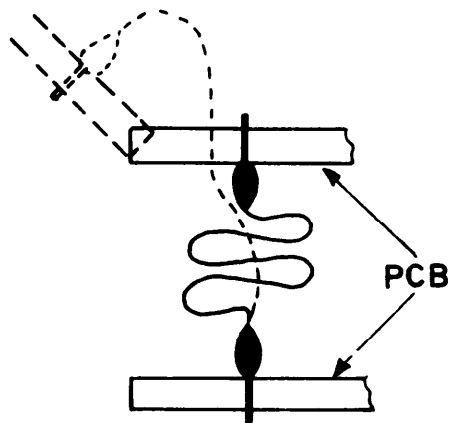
Flat Cable Used as a Hinge (Ref. 14)
